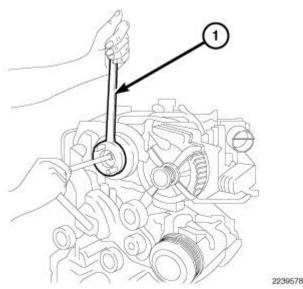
Camshaft Sprocket Courtesy of CHRYSLER LLC
